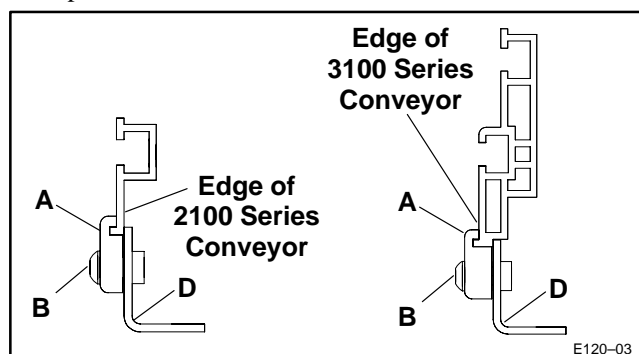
2100 Series Conveyor Trough Mounting Bracket and Mounting Clip Attachment Detail
